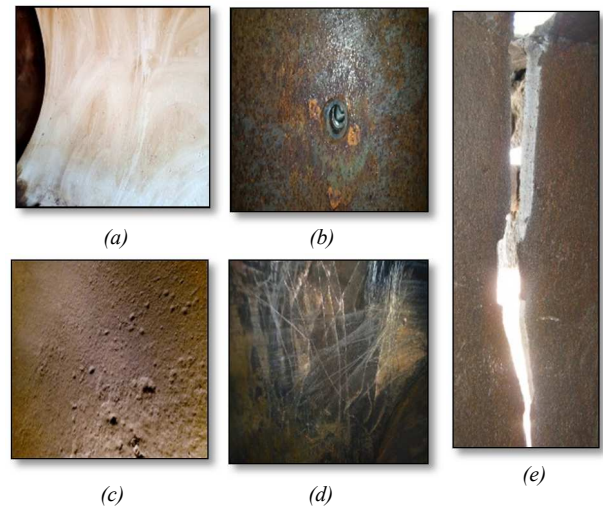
(a) Good, (b) Corrosion, (c) Pitting Corrosion, (d) Mechanical Damage, (e) Brittle Fracture
